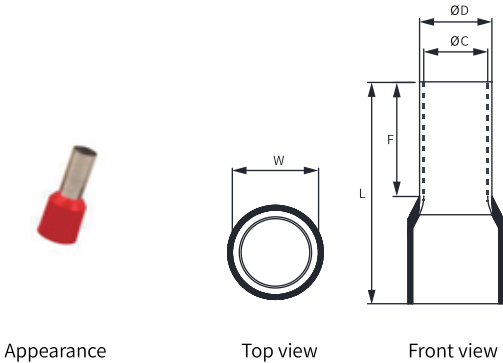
Appearance and dimensions of the tube pre-insulated lug (TG-JT type)
